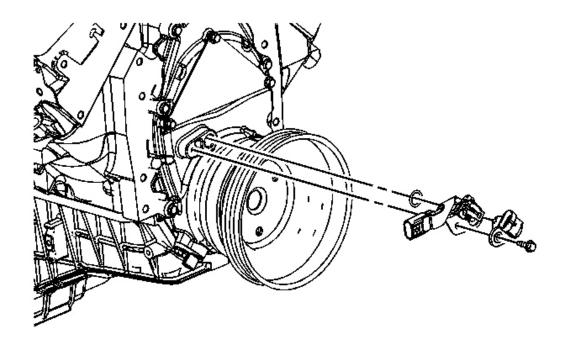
View Of CMP Sensor & Bolt Courtesy of GENERAL MOTORS CORP.
